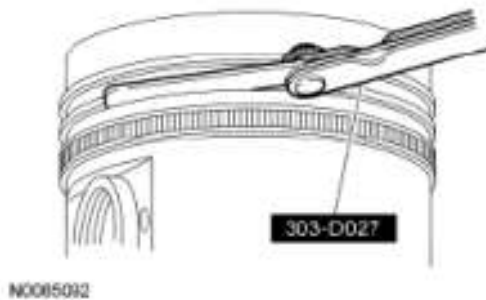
Measuring Piston Ring-To-Groove Clearance
